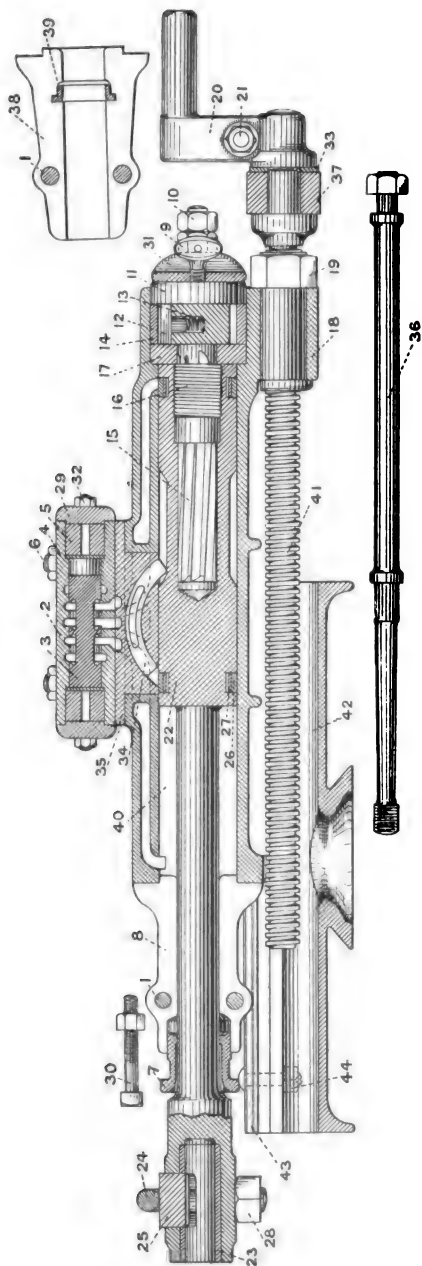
Ingersoll-Sergeant "Auxiliary Valve" Drill—Square Guide Cylinder.
